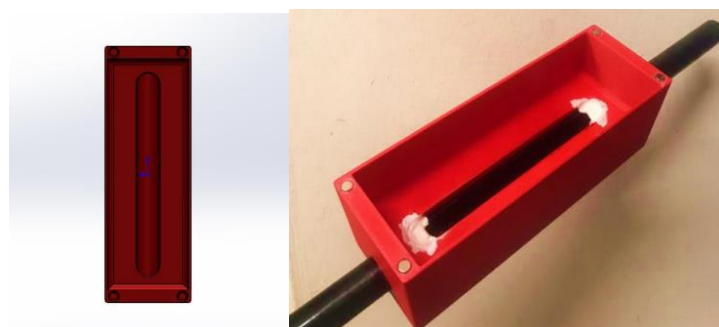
(a) Casing Box Design and (b) Actual Casing Box
